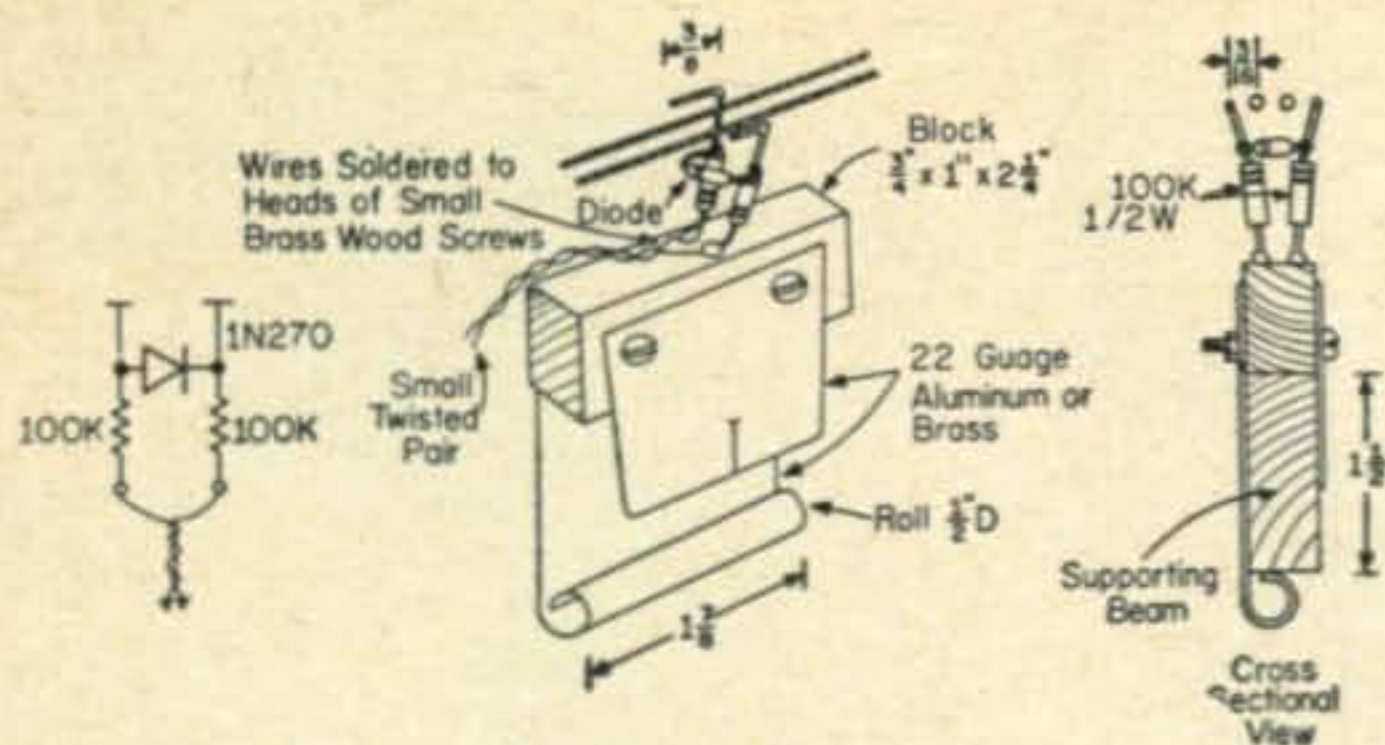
Construction details of the sliding detector. The spring portion of the rear brass plate should be shaped for a snug fit with the beam.
